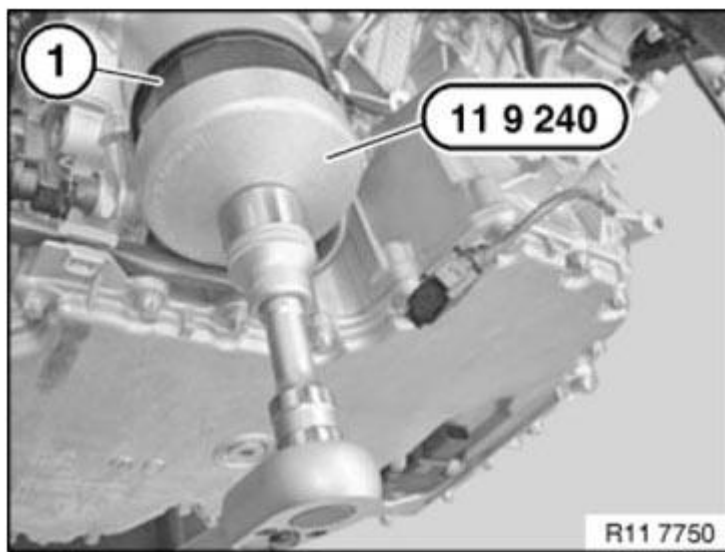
Removing Oil Filter Cover With Special Tool 11 9 240
